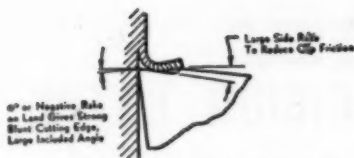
The cutting edge is removed without destroying the positive side rake at point of contact between chip and carbide.
